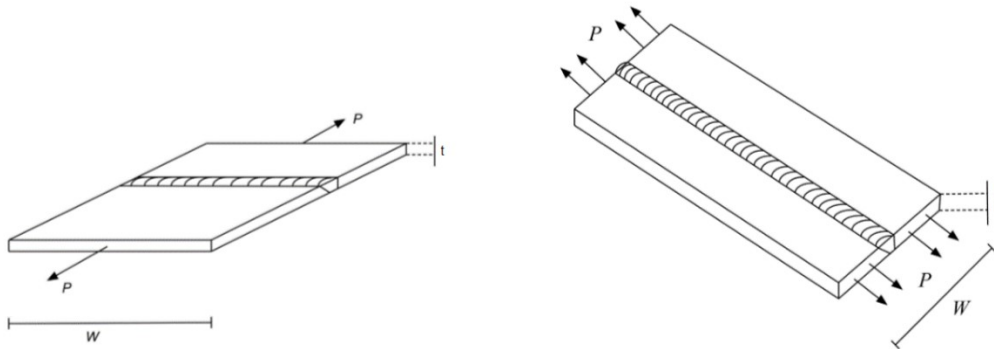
The two idealized loading conditions being examined. (a) Loading perpendicular to weld. (b) Loading parallel to weld. Copied from [6]
